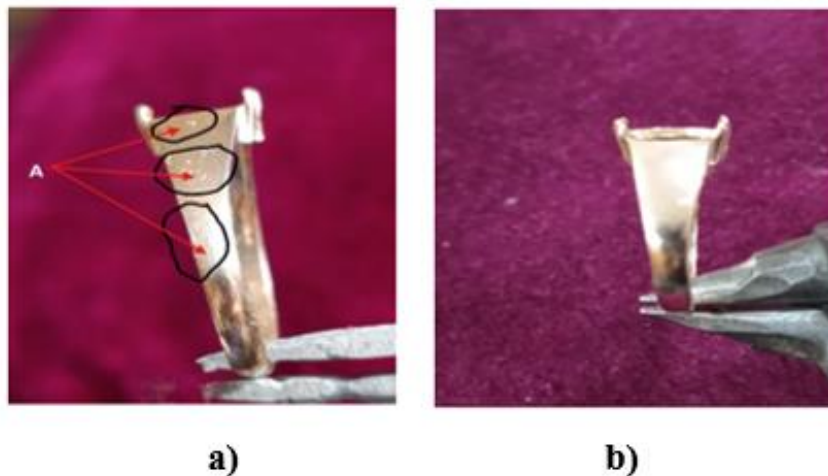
Samples. a- with casting defects, b-without casting defects.
